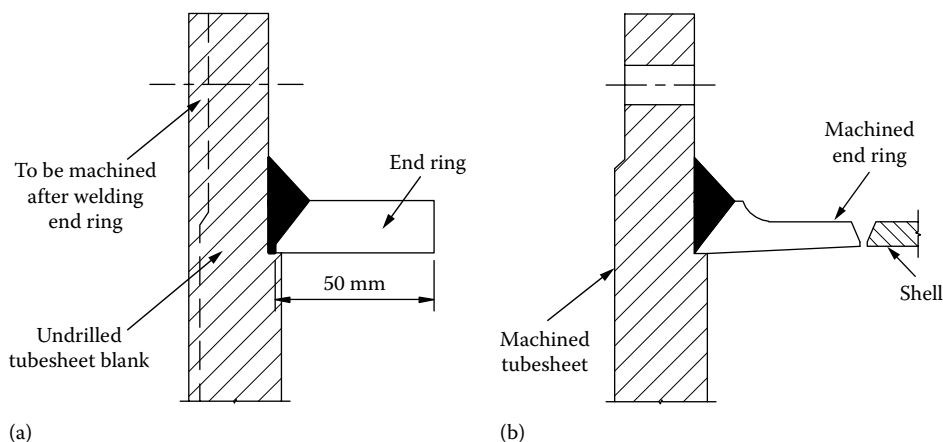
Tubesheet with end ring welded. (a) Before machining and (b) after machining.
